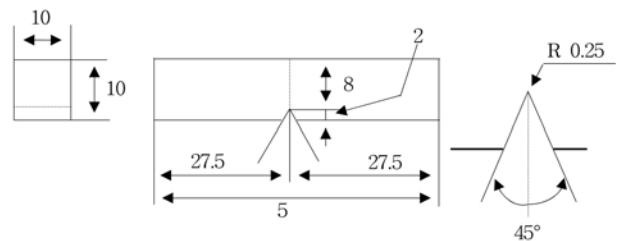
Dimension of Charpy Impact Test Specimen (unit : mm).
